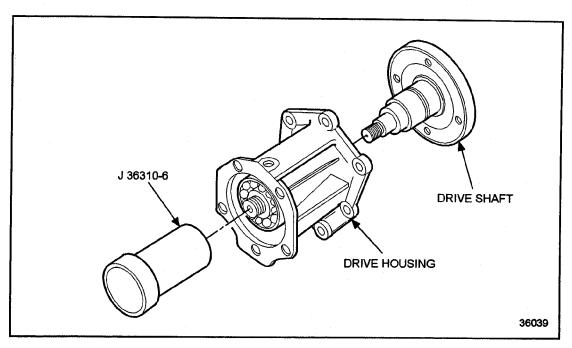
Air Compressor/Raw Water Pump Drive Shaft Installation (Current Design)
